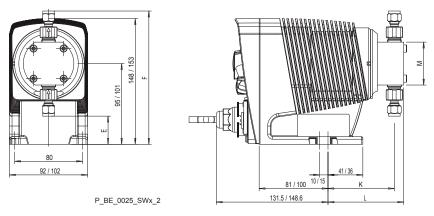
Dimensional drawing Beta b BT4b/BT5b, material version SS - dimensions in mm
